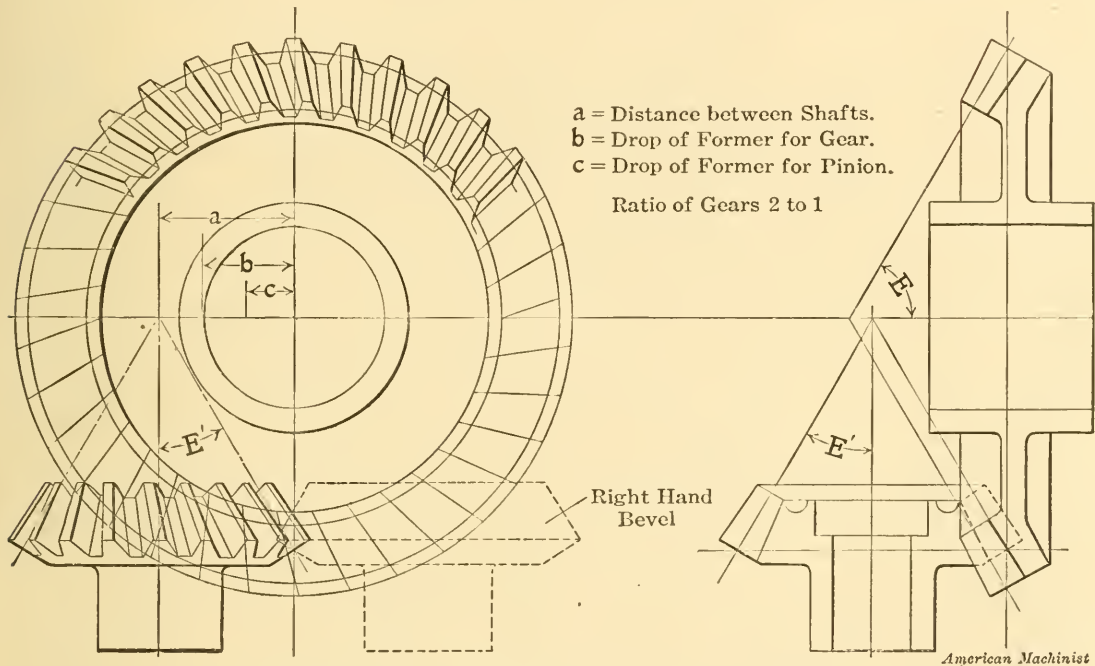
LAYOUT FOR SKEW BEVEL GEARS.
